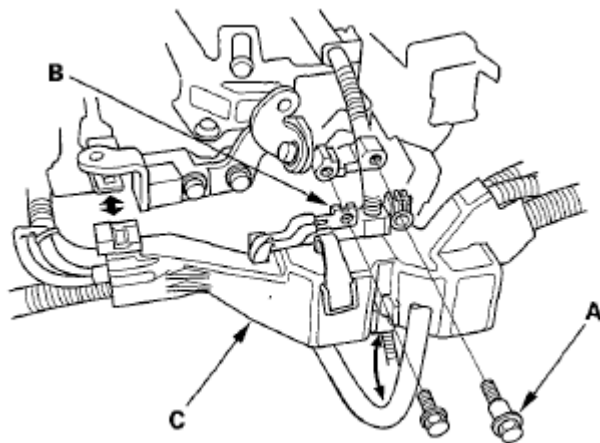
Identifying Harness Holder Mounting Bolt, Ground Cable & Harness Holder
